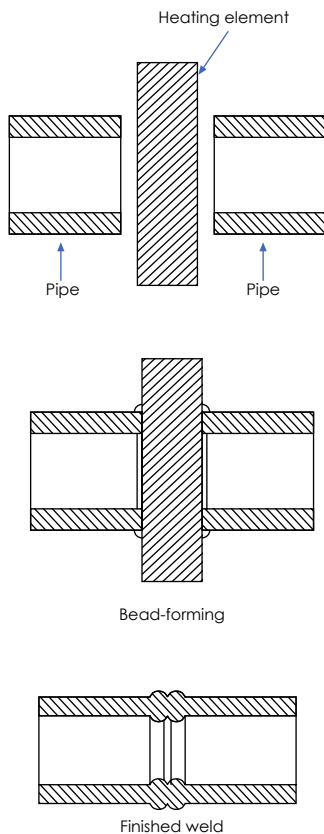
PRINCIPLE OF HEATED-TOOL BUTT WELDING AS PER SANS/ISO 10268-1 - EDITION 1.3
